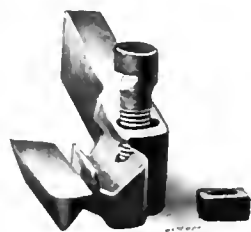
The Holder with Blade Removed, showing Method of Holding
